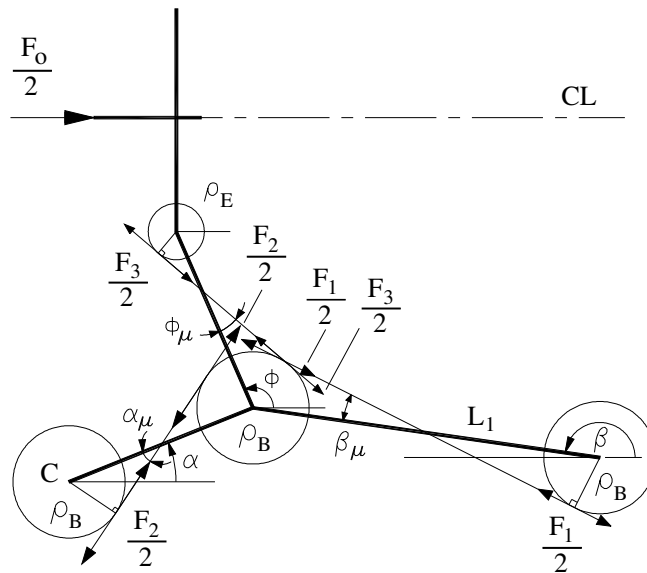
Toggle linkage subjected to loading during the real-mould clamping process
